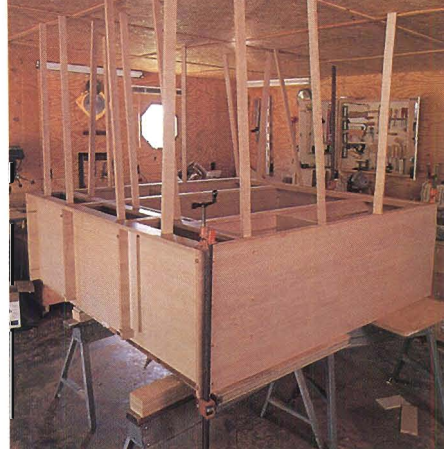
Once the pieces are cut and the dowel holes are drilled, assemble the face frame. Gluing the frame to the carcass can be a challenge, but with a little ingenuity you can get by with just a few clamps.
